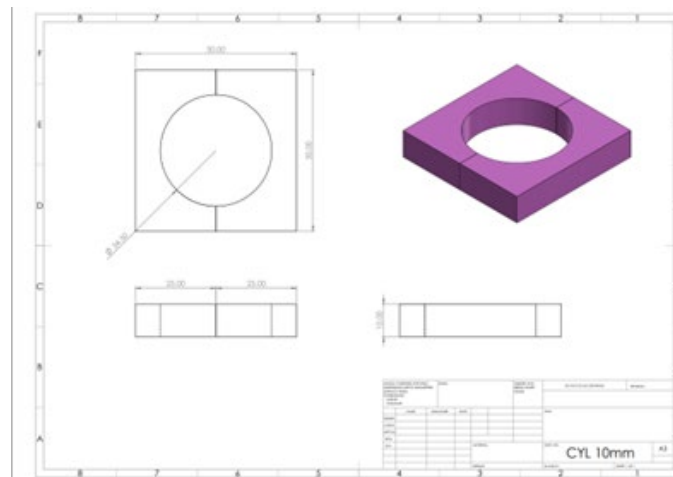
Dimension of mould size for the composite cylindrical samples
